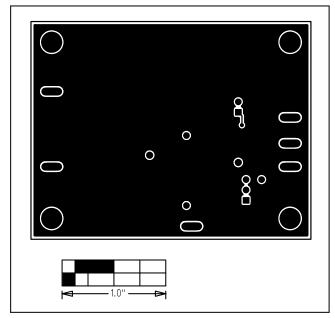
MAX16913A EV Kit PCB Layout—Solder Side
